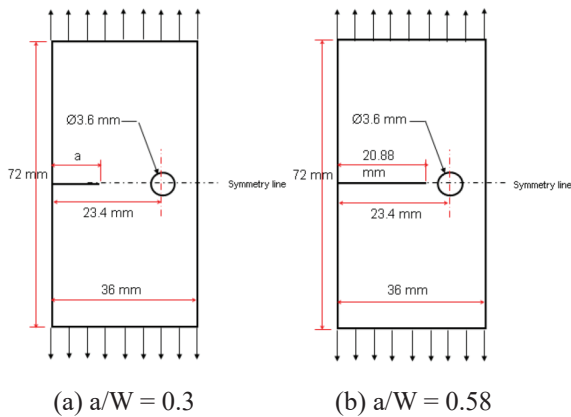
Position of a hole varied with crack length ratios on single edge cracked plate.
